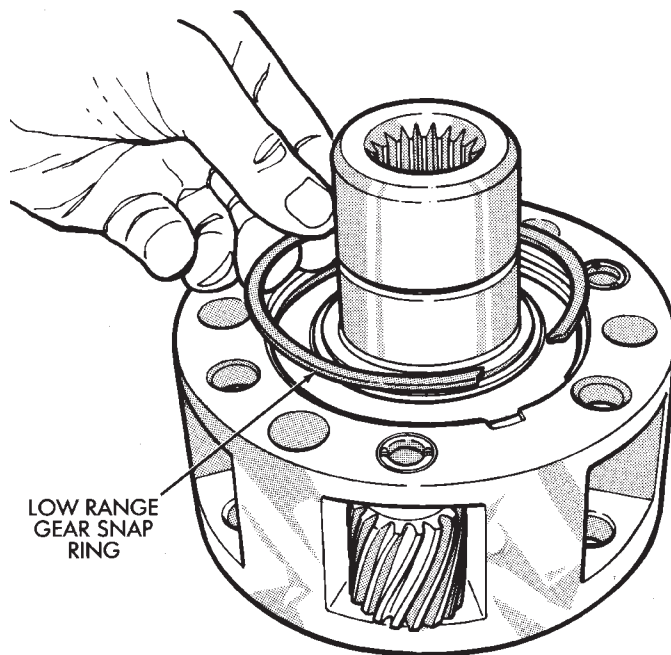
Low Range Gear Snap Ring Removal/ Installation
